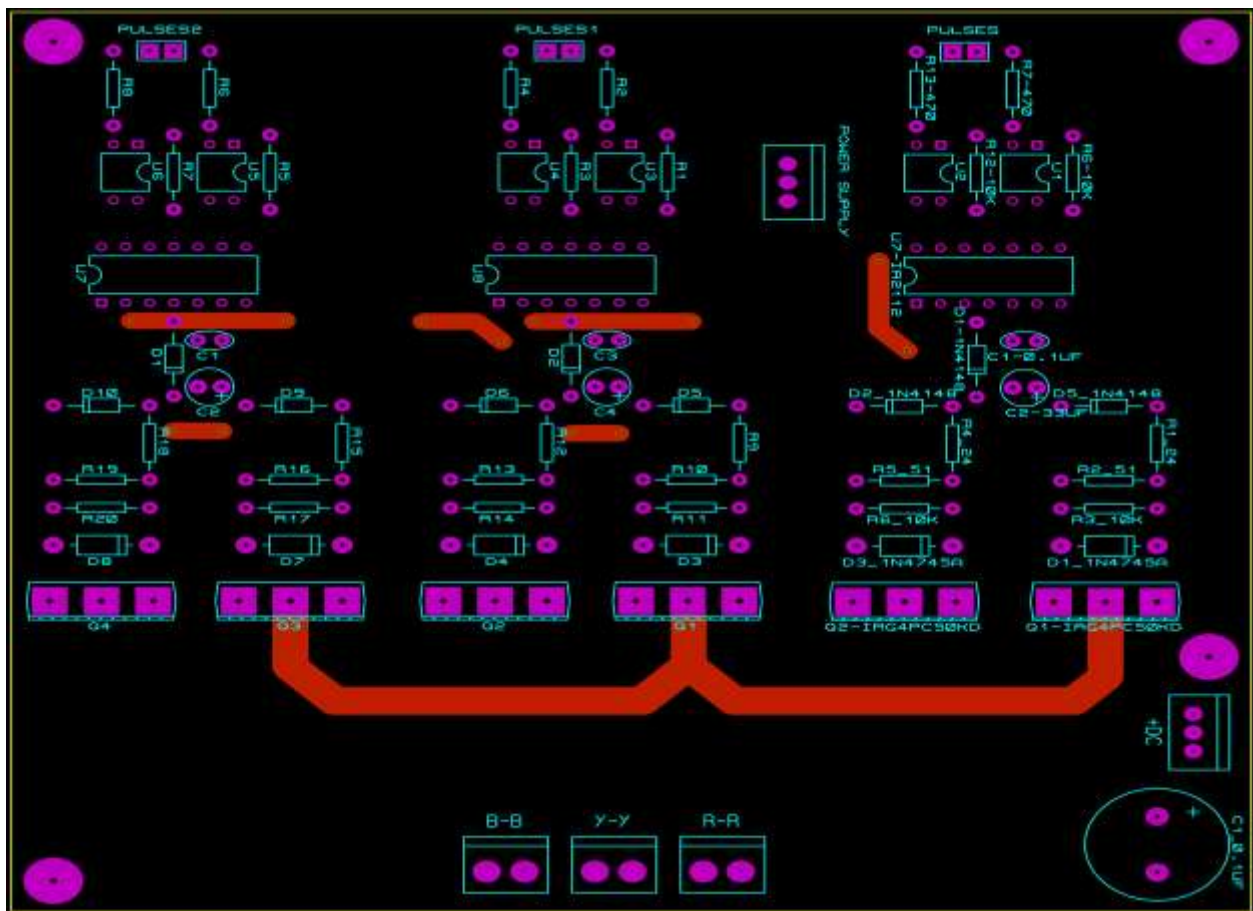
Top & Bottom layer pictures of PCB for control 3 Phase IM
